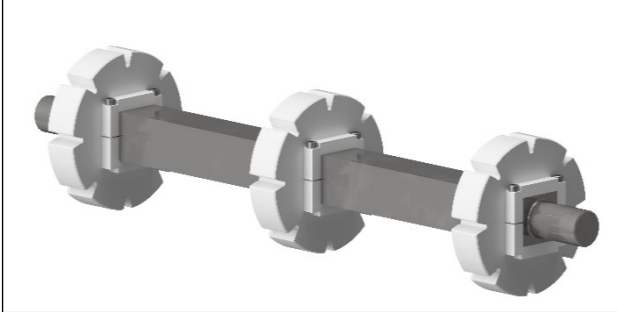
DRIVE SHAFT WITH FULL LUG SPROCKETS
